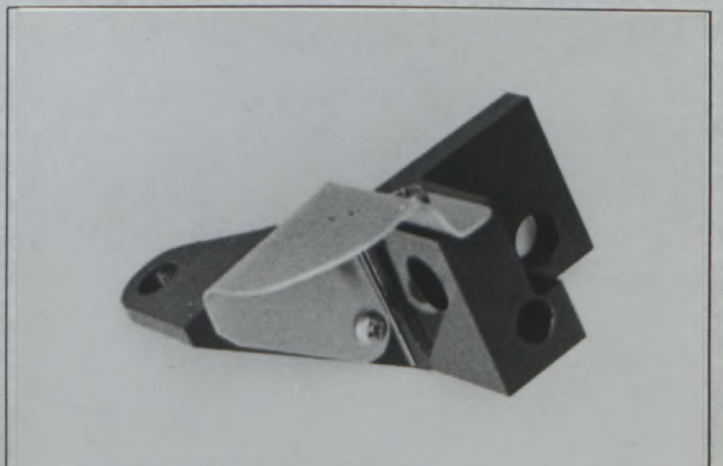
Heavy duty steering knuckle arm TYPE E
